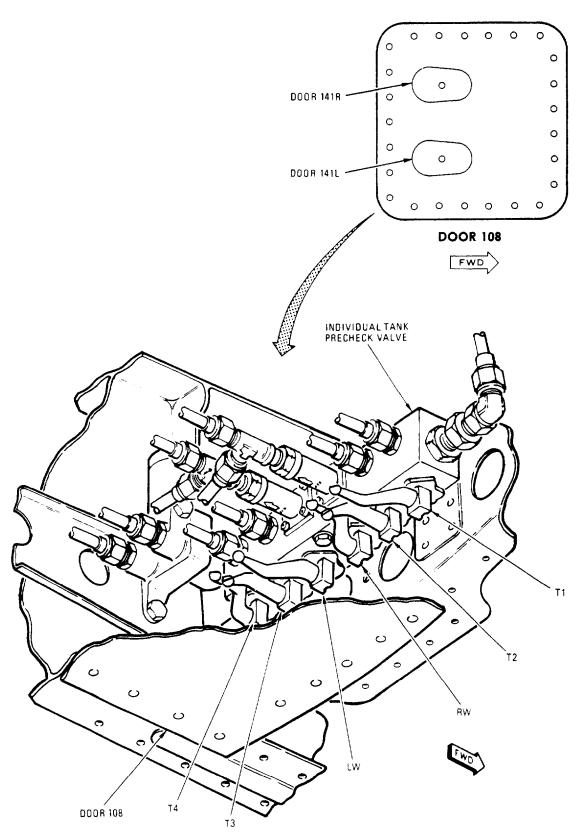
Transfer Leak Test Component Locator (Sheet 3)
